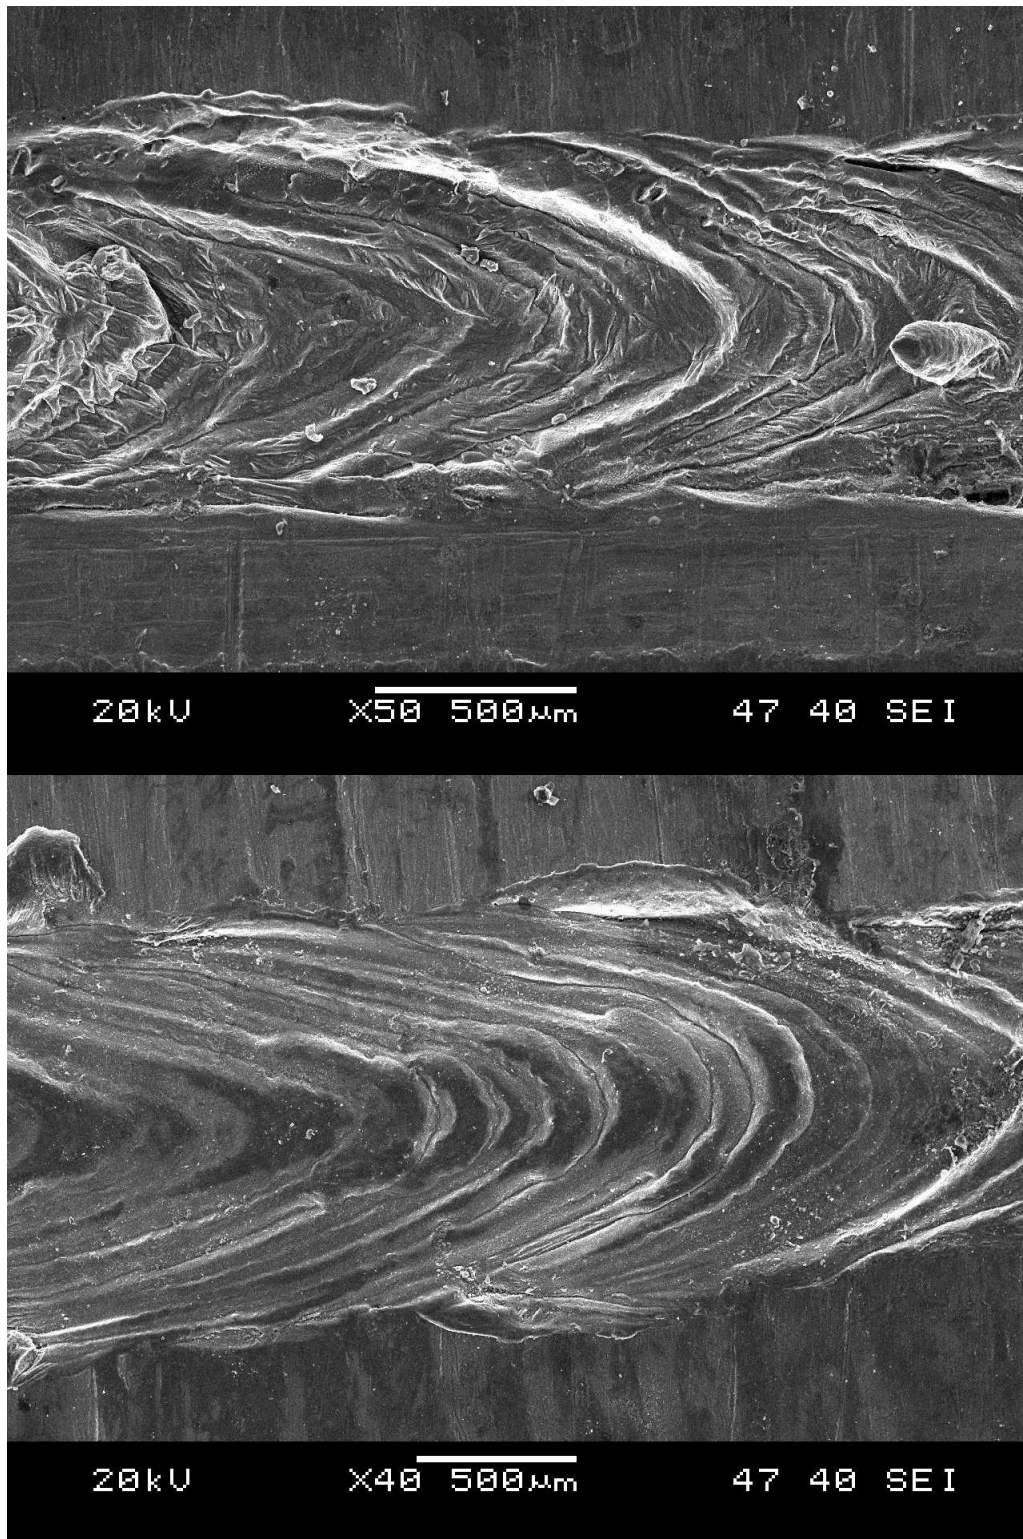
Fibre laser weld made at 2 kW and 150 mm/s: a) top and b) bottom weld bead surfaces.
